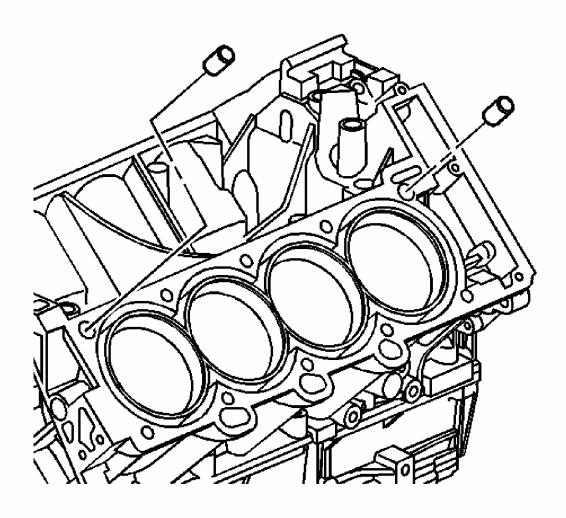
Identifying Cylinder Head Locating Pins Courtesy of GENERAL MOTORS CORP.
